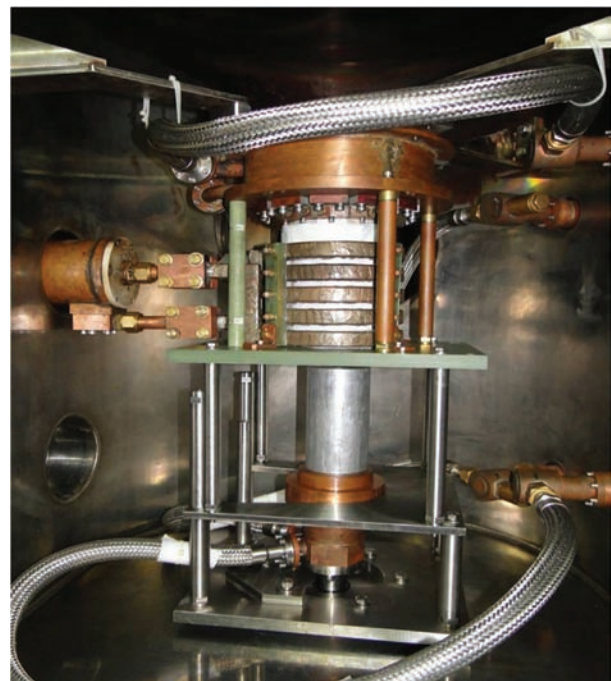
Water-cooled segmented crucible complete with inductor and in-situ casting module
